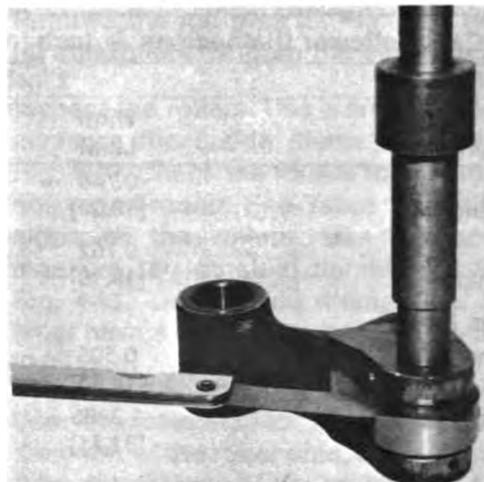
(N10406). Install The Roller And Roller Pin.
